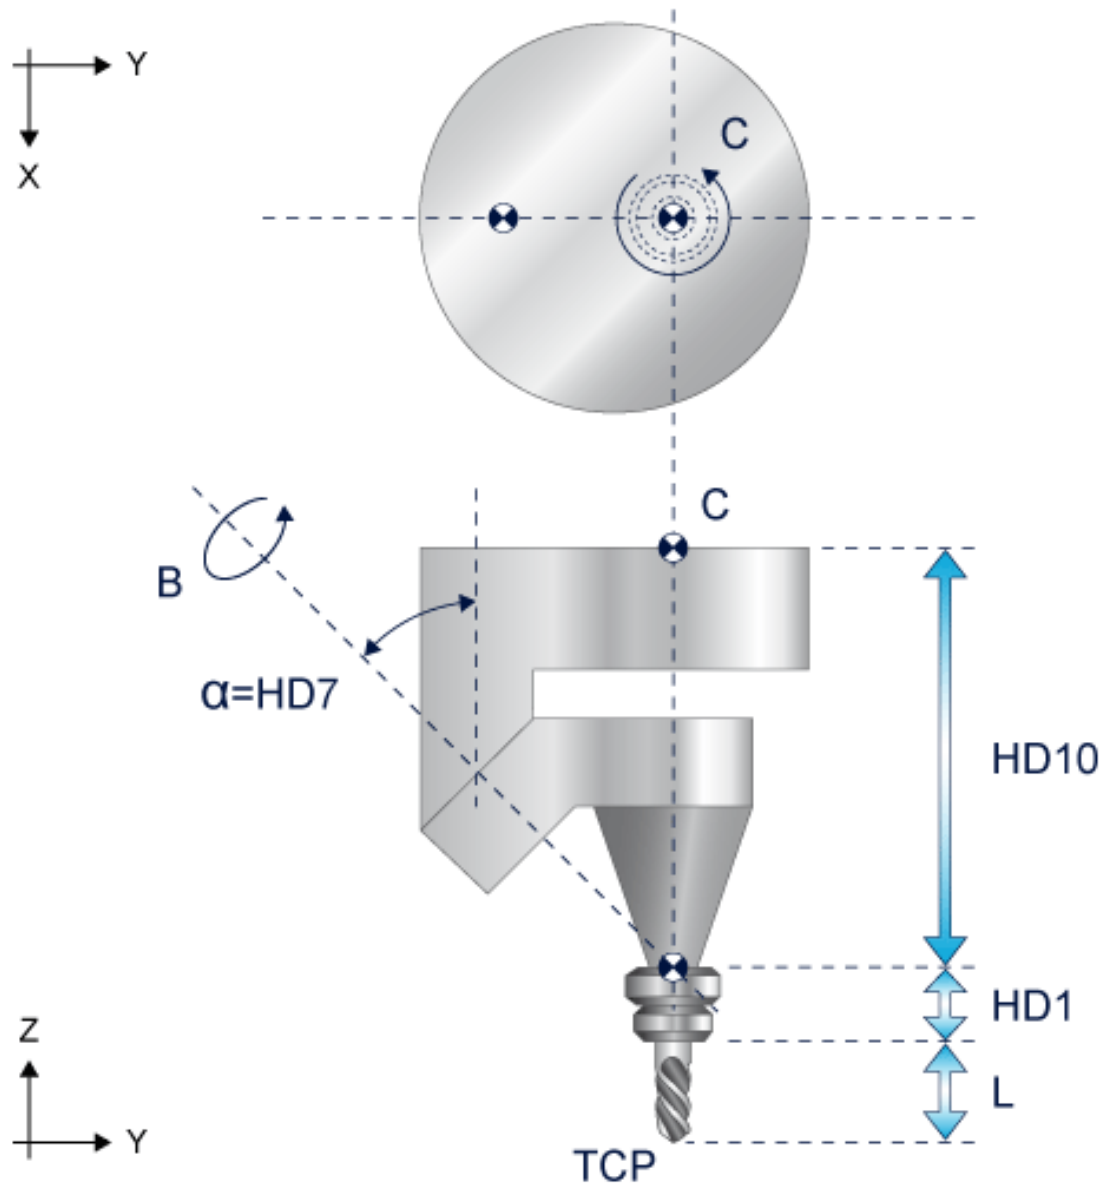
Cardanic head with ideal head geometry (intersection of C and B axis located in tool axis)
